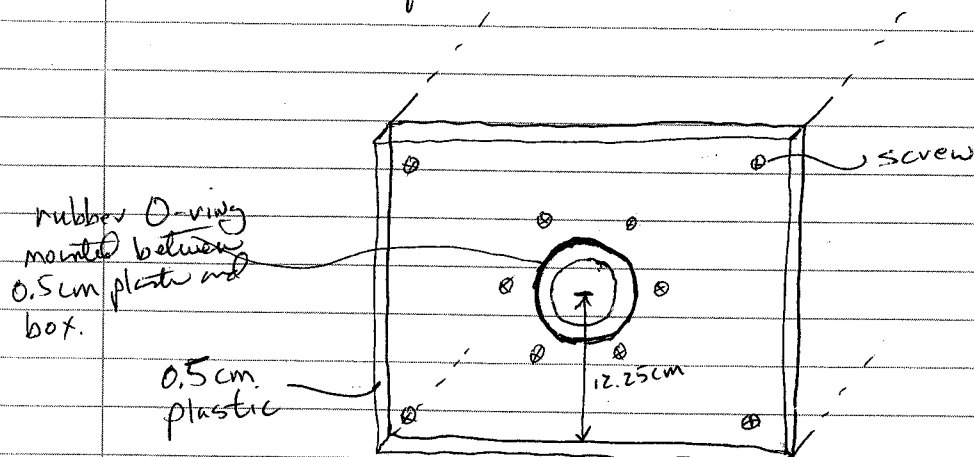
Schematic of piece of plastic with 6.35 cm hole drilled in it mounted on inside at one end of box to accomodate mounting of ceramic tube.
